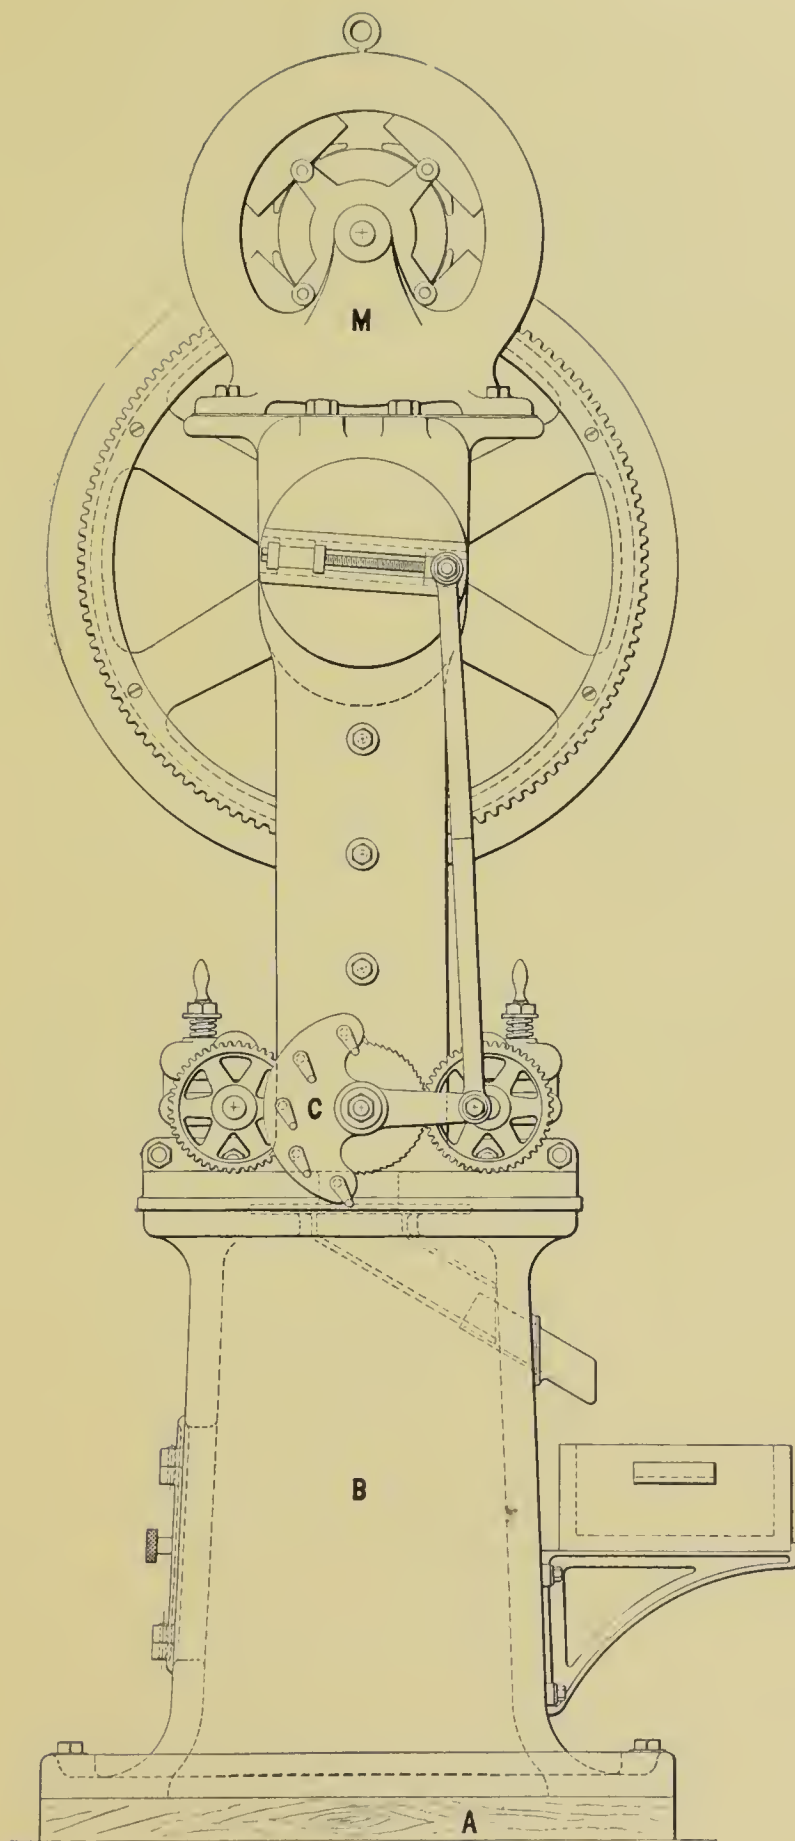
CUTTING PRESS—SIDE VIEW.
